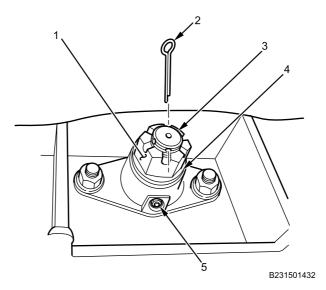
Towing Pintle Hook Assembly from Backside of Rear Frame Crossmember.
